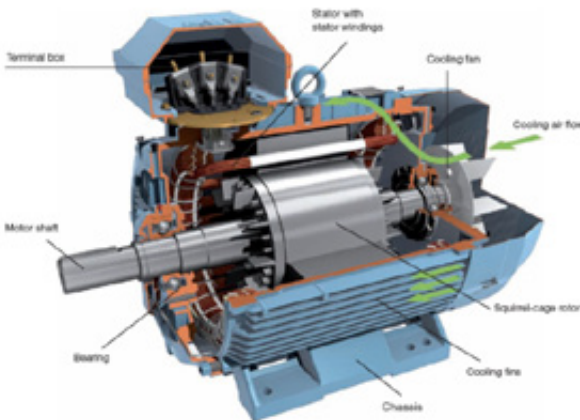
Induction motor cutaway view, ABB Motors & Drives, 2007
